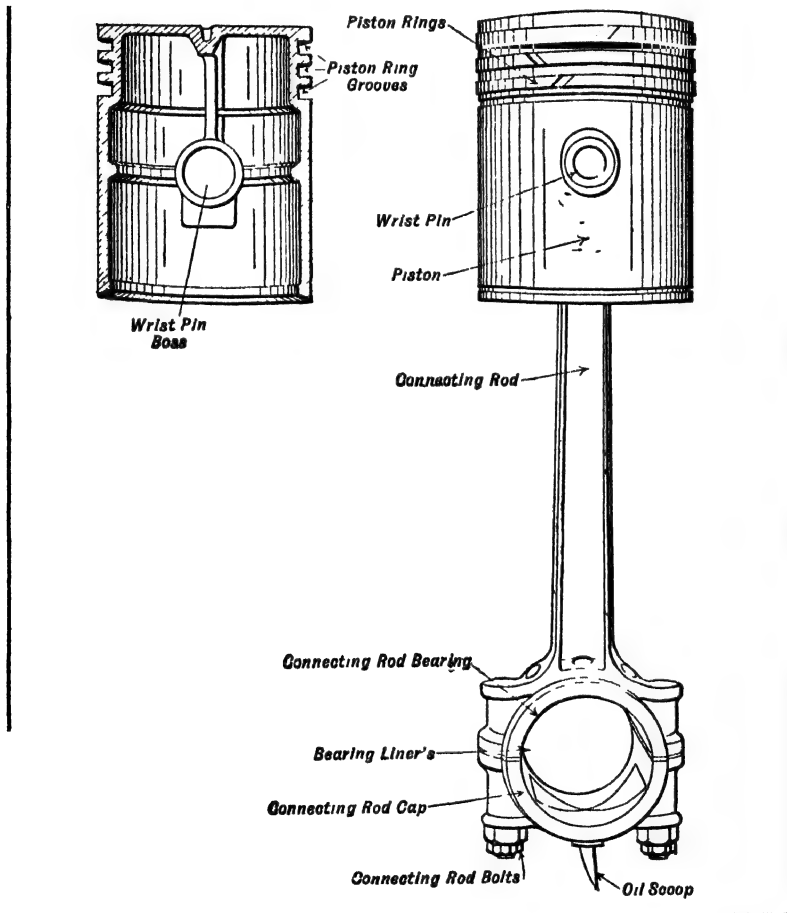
Typical Automotive Engine Piston and Connecting Rod Assembly.
